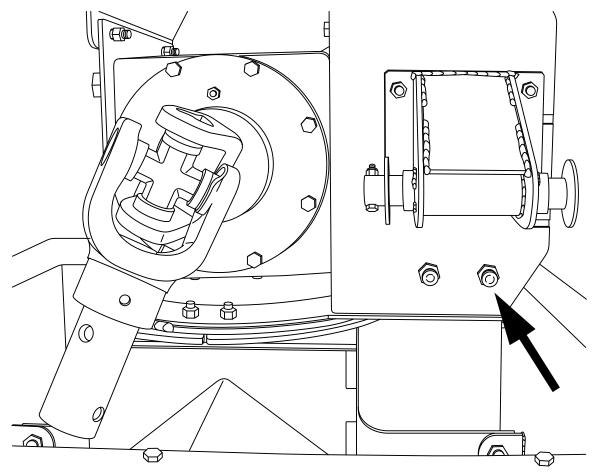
Hydraulic Hose Connections at Center Sump Upper Gearbox Bracket
